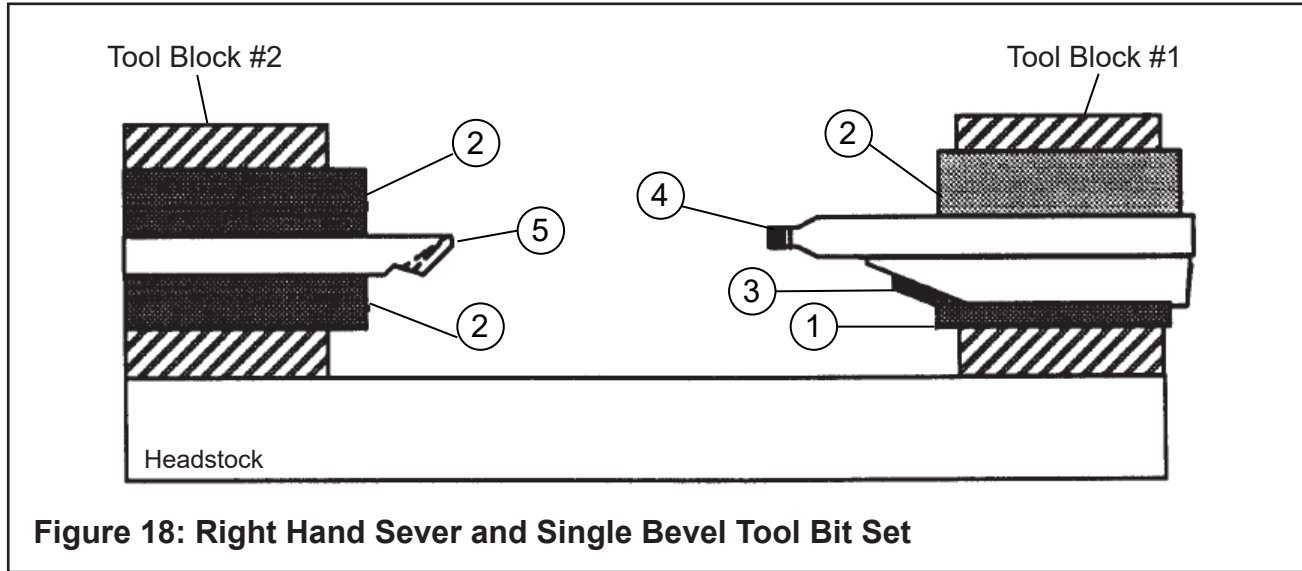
Right Hand Sever and Single Bevel Tool Bit Set
